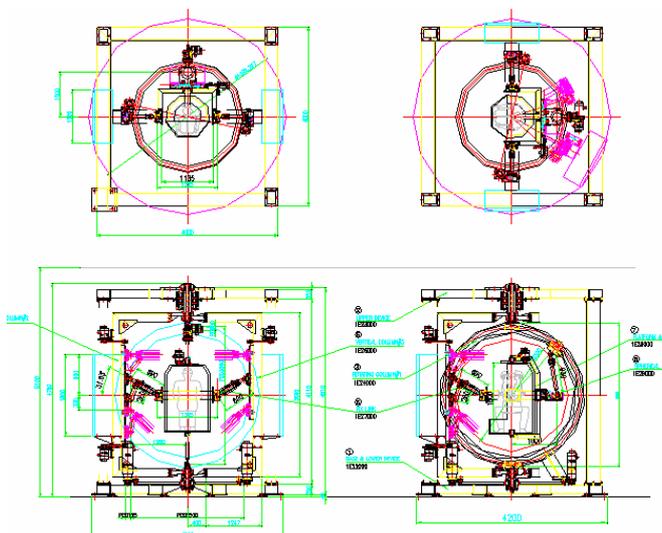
Assembly drawing of Eclipse-II one-man ride machine
